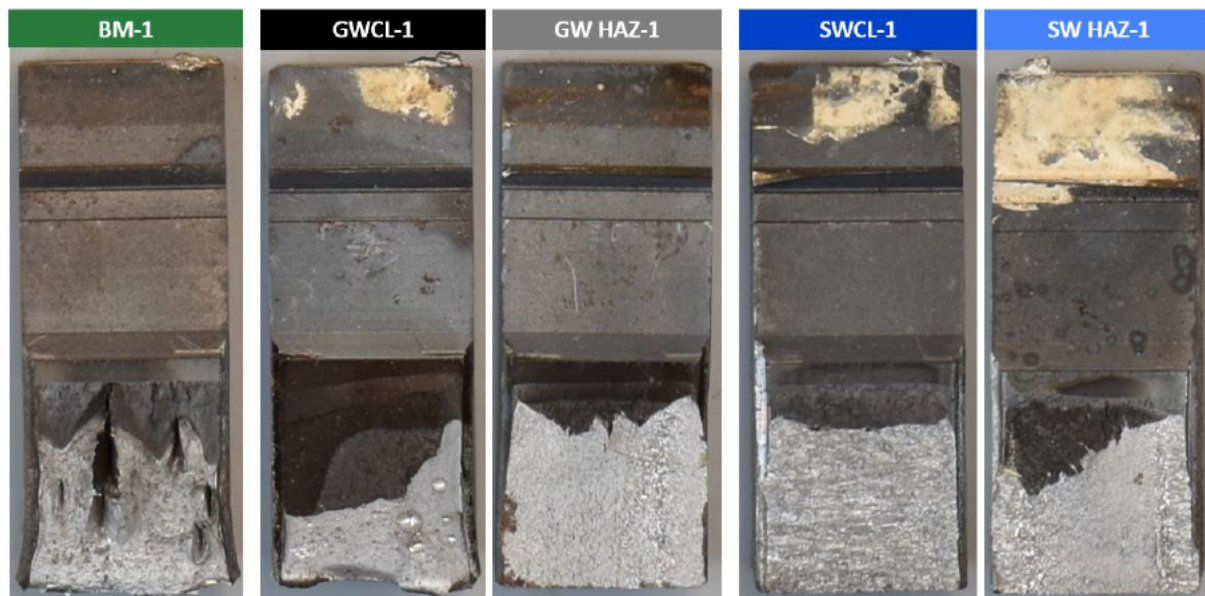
Post test fracture surfaces of base metal, GWHAZ and SWHAZ specimens from X65 1988.
